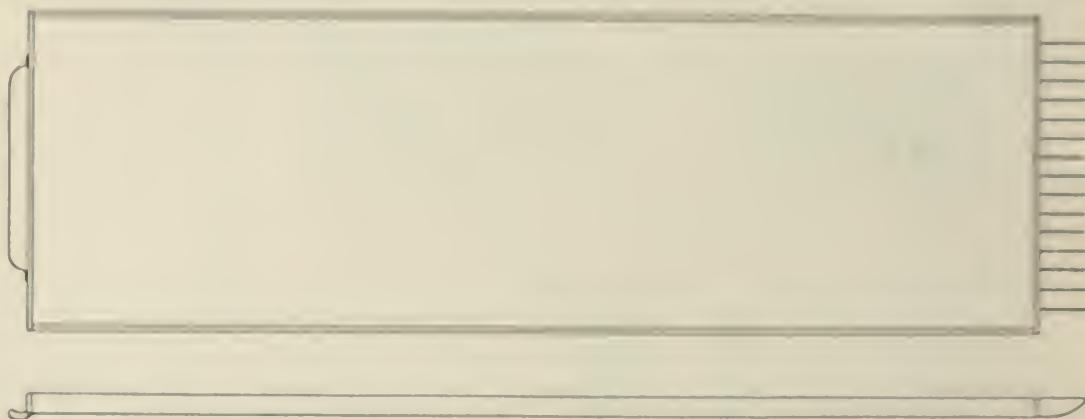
Peat Moulding Frame at West Torup, Sweden.
